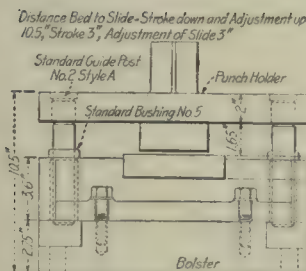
DIMENSIONS OF TOOLS FOR No. 73½ BLISS PRESS
